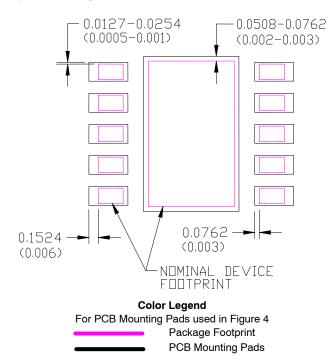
10 Pin DFN Package Footprint Shown with PCB Mounting Pads
